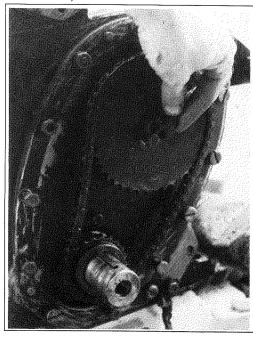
Make clear scribe marks on the top timing wheel and engine front plate to ensure its later replacement in exactly the same
